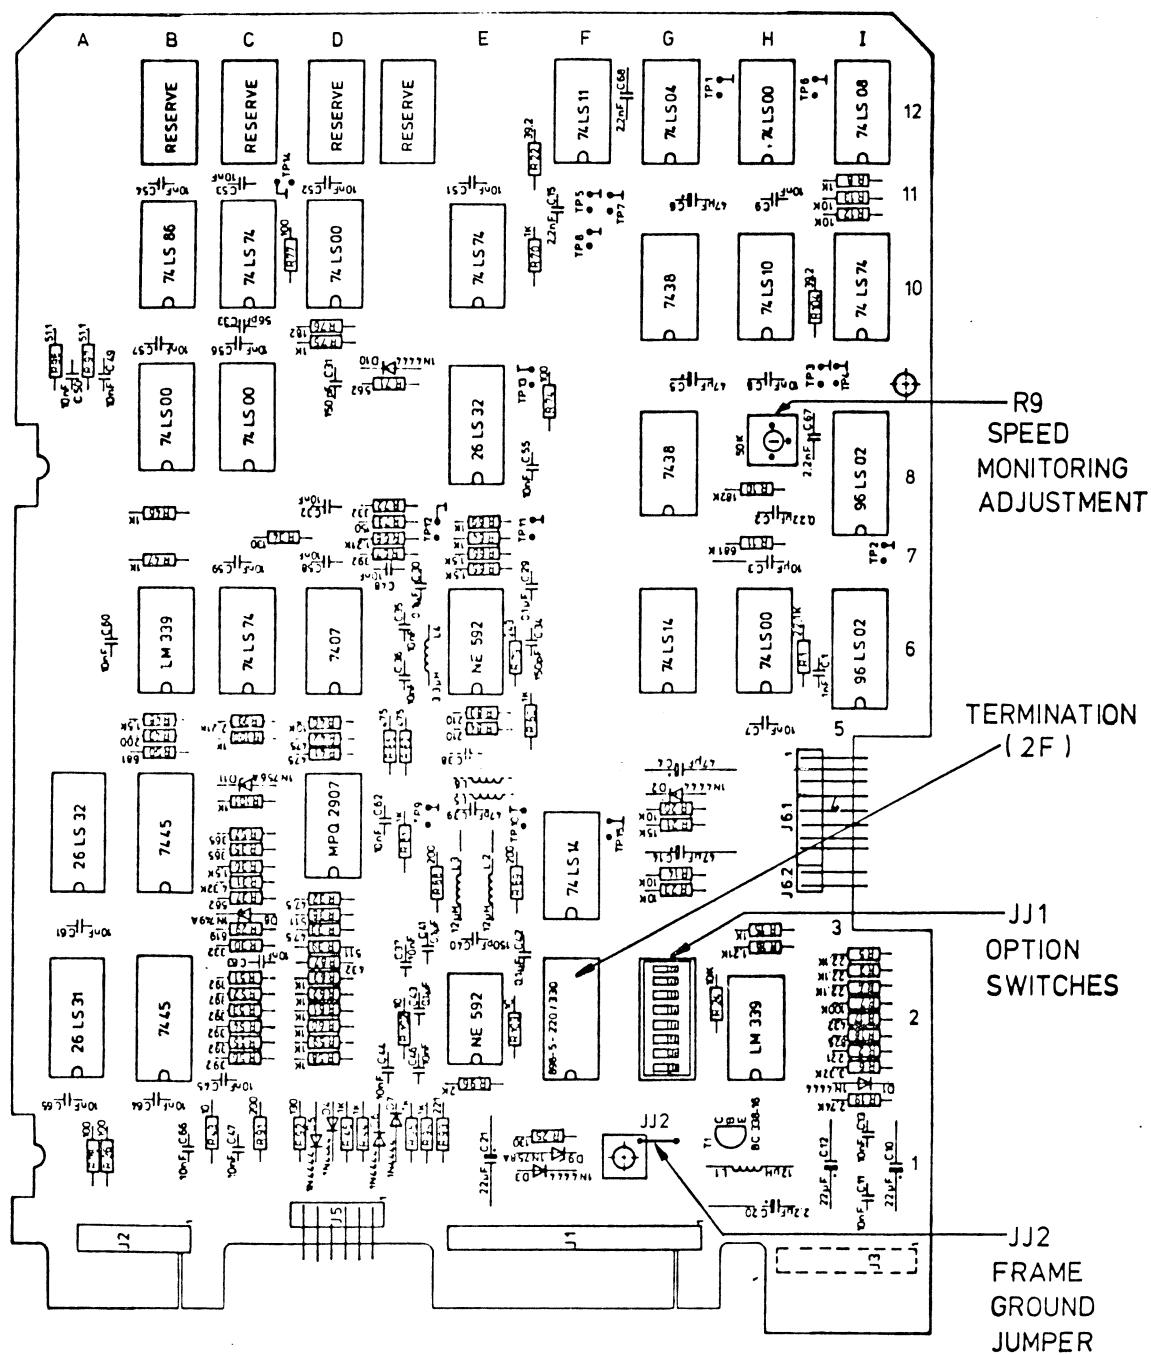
READ-WRITE-CONTROL PCB COMPONENT LOCATION
